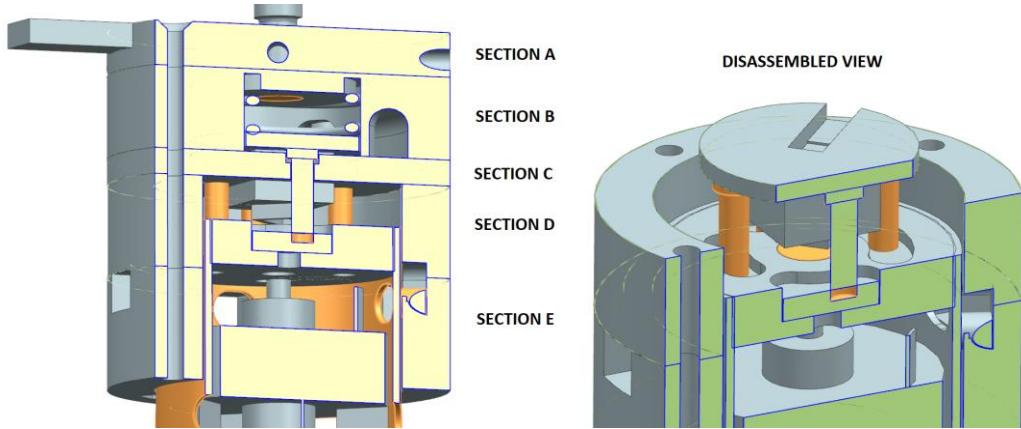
CAD Cross Sectional View of the Tool Changer Mechanism
